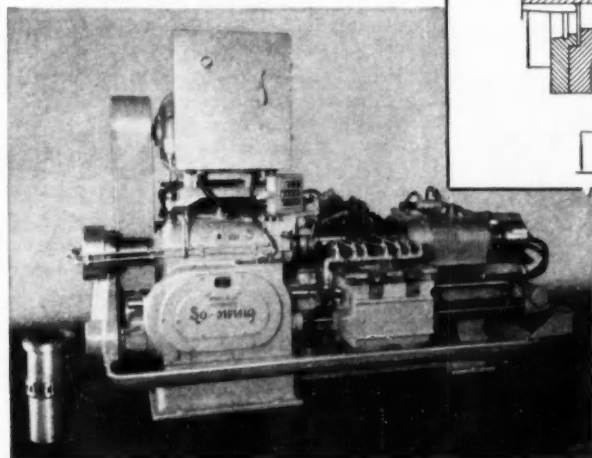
Model R-18 Lo-swing Lathe equipped for machining large cylinder liners.
